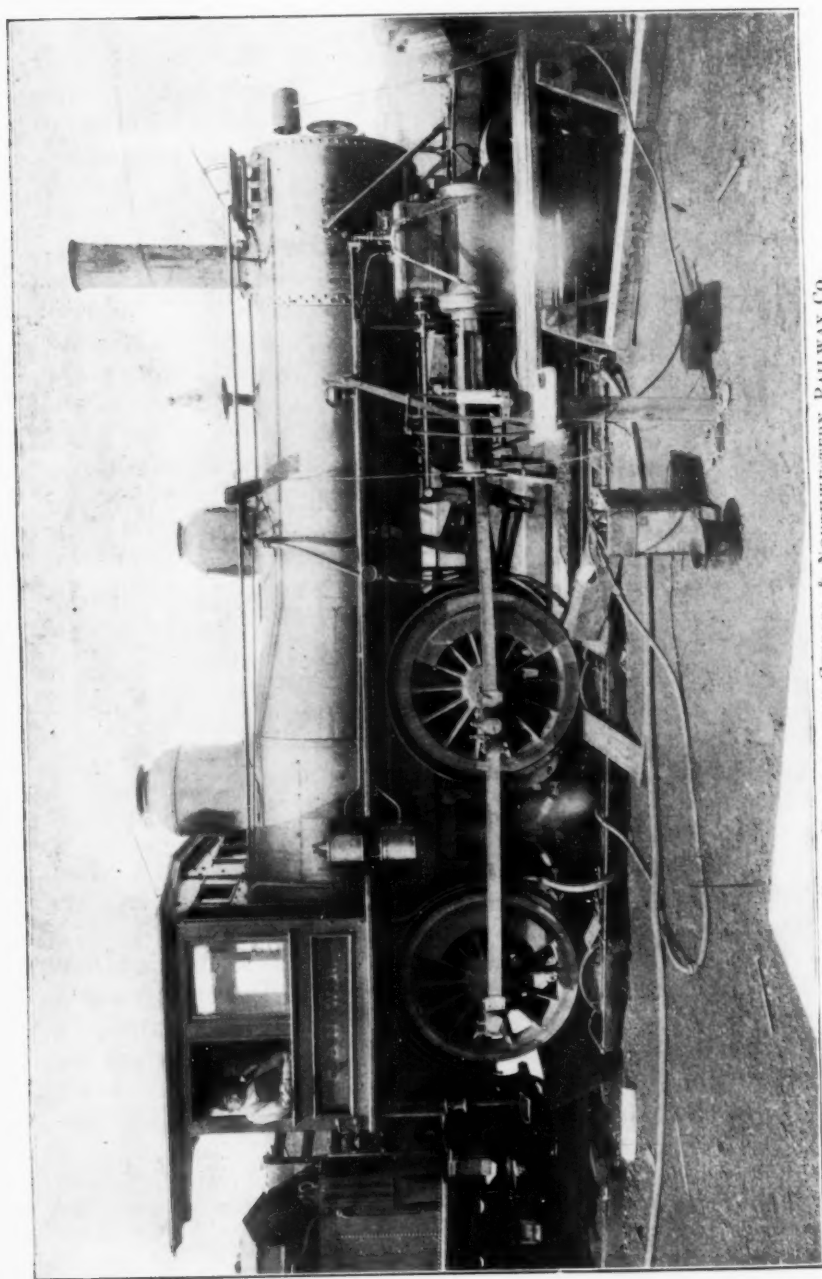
FIRST PLANT OF THE CHICAGO & NORTHWESTERN RAILWAY CO.
